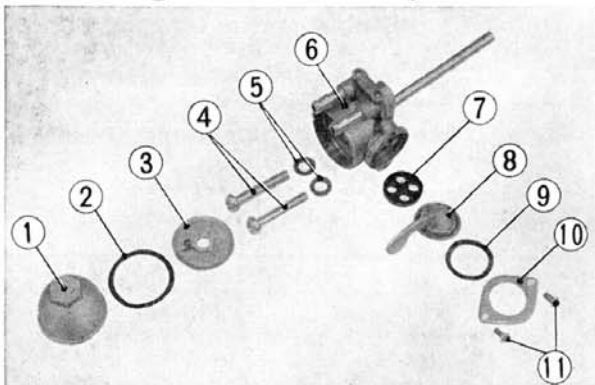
① Fuel strainer cup ② O ring ③ Fuel strainer screen ④ 6mm cross screws ⑤ Fuel cock fixing packing ⑥ Fuel valve body ⑦ Fuel cock valve packing ⑧ Fuel cock lever ⑨ Cock lever spring ⑩ Setting plate ⑪ Cross screws
